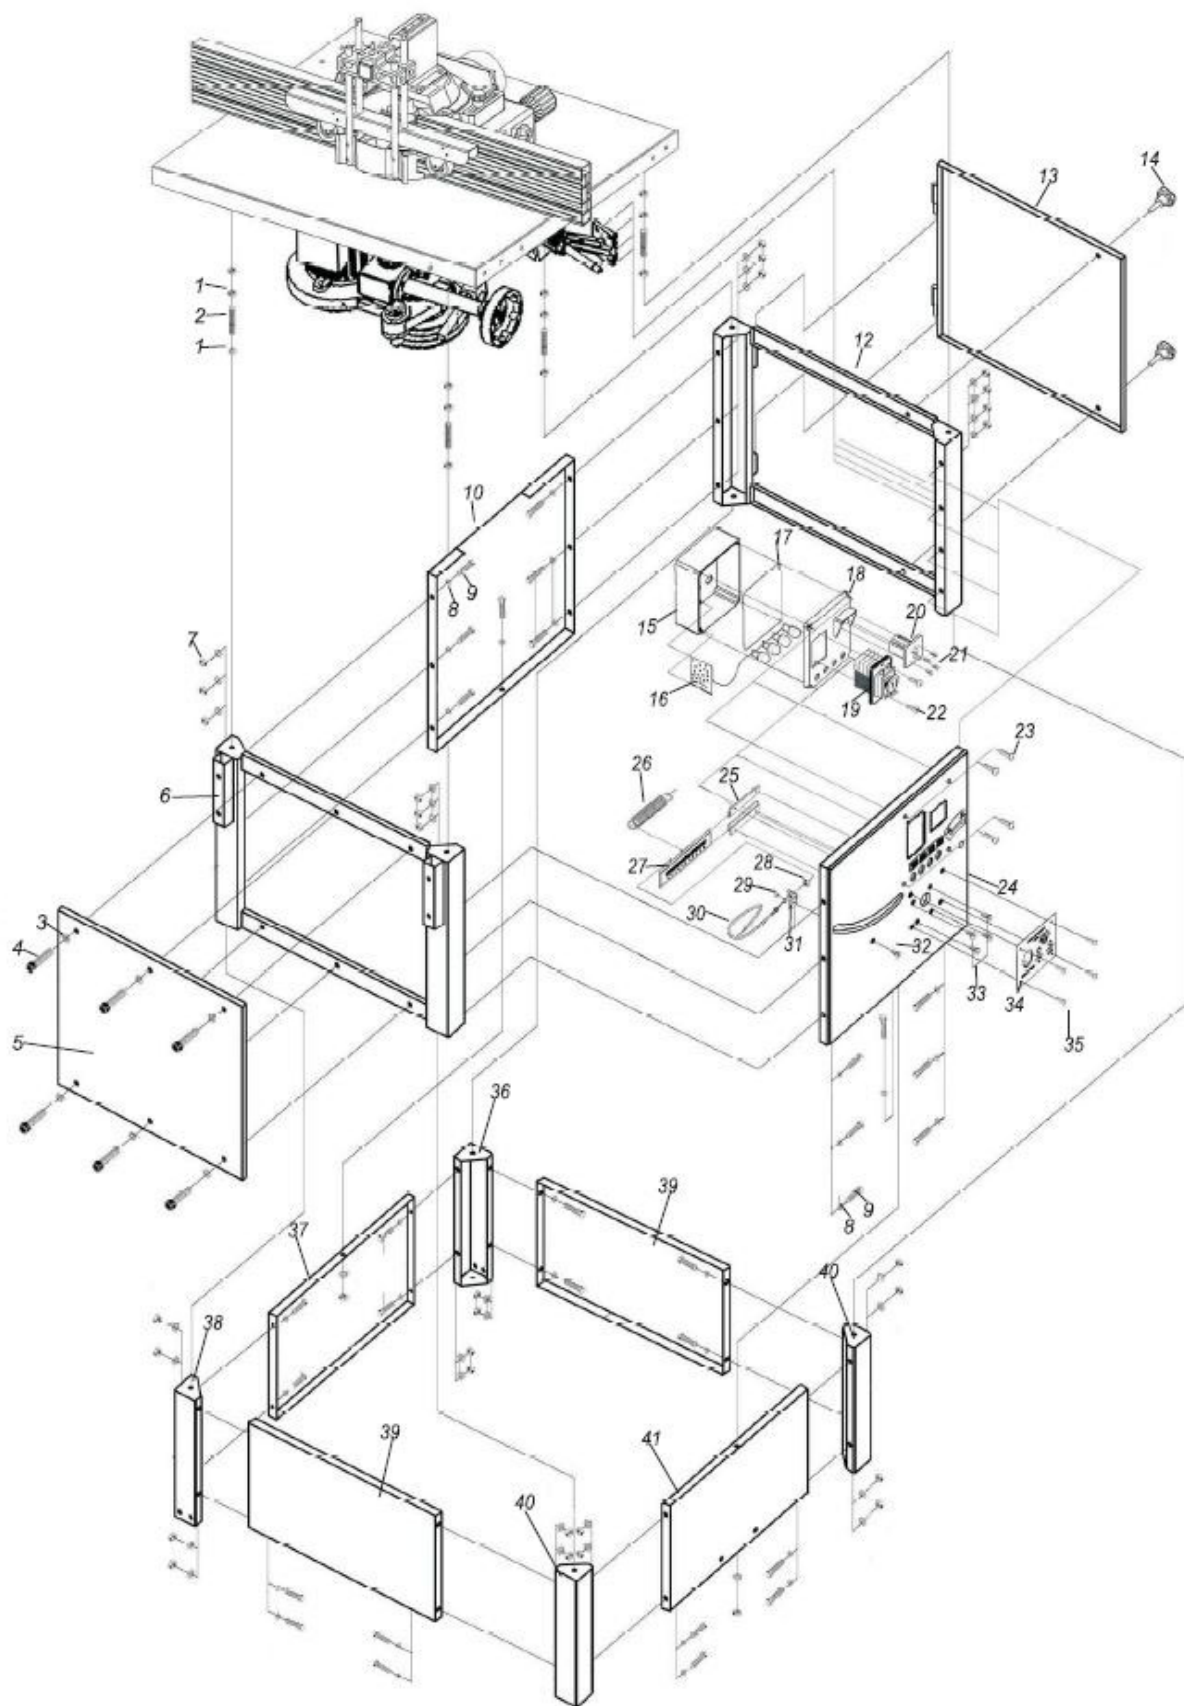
Spare parts drawing 4 - Table router TF 190 SE
